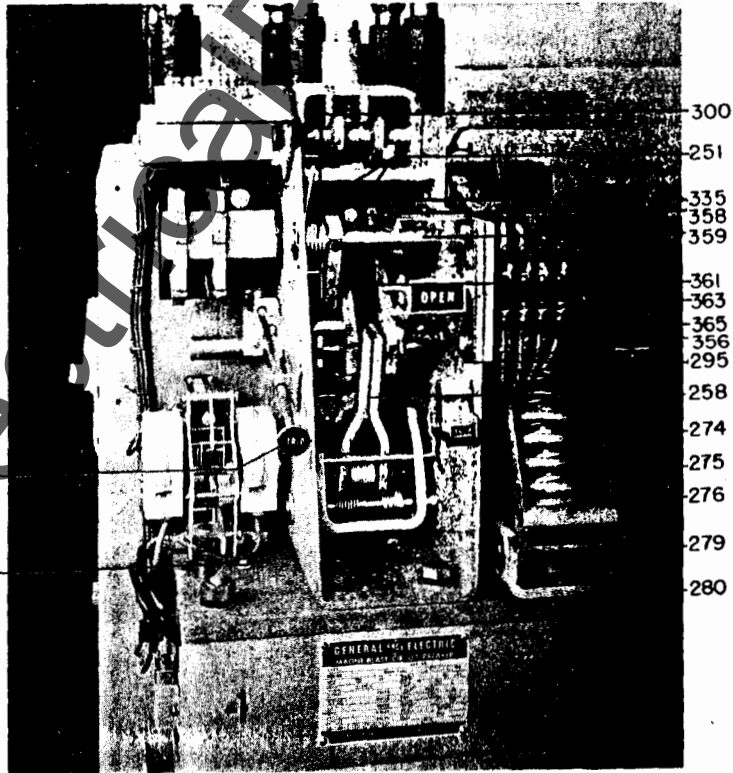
B MS-13 Mechanism - Front View (-4S Breaker)
